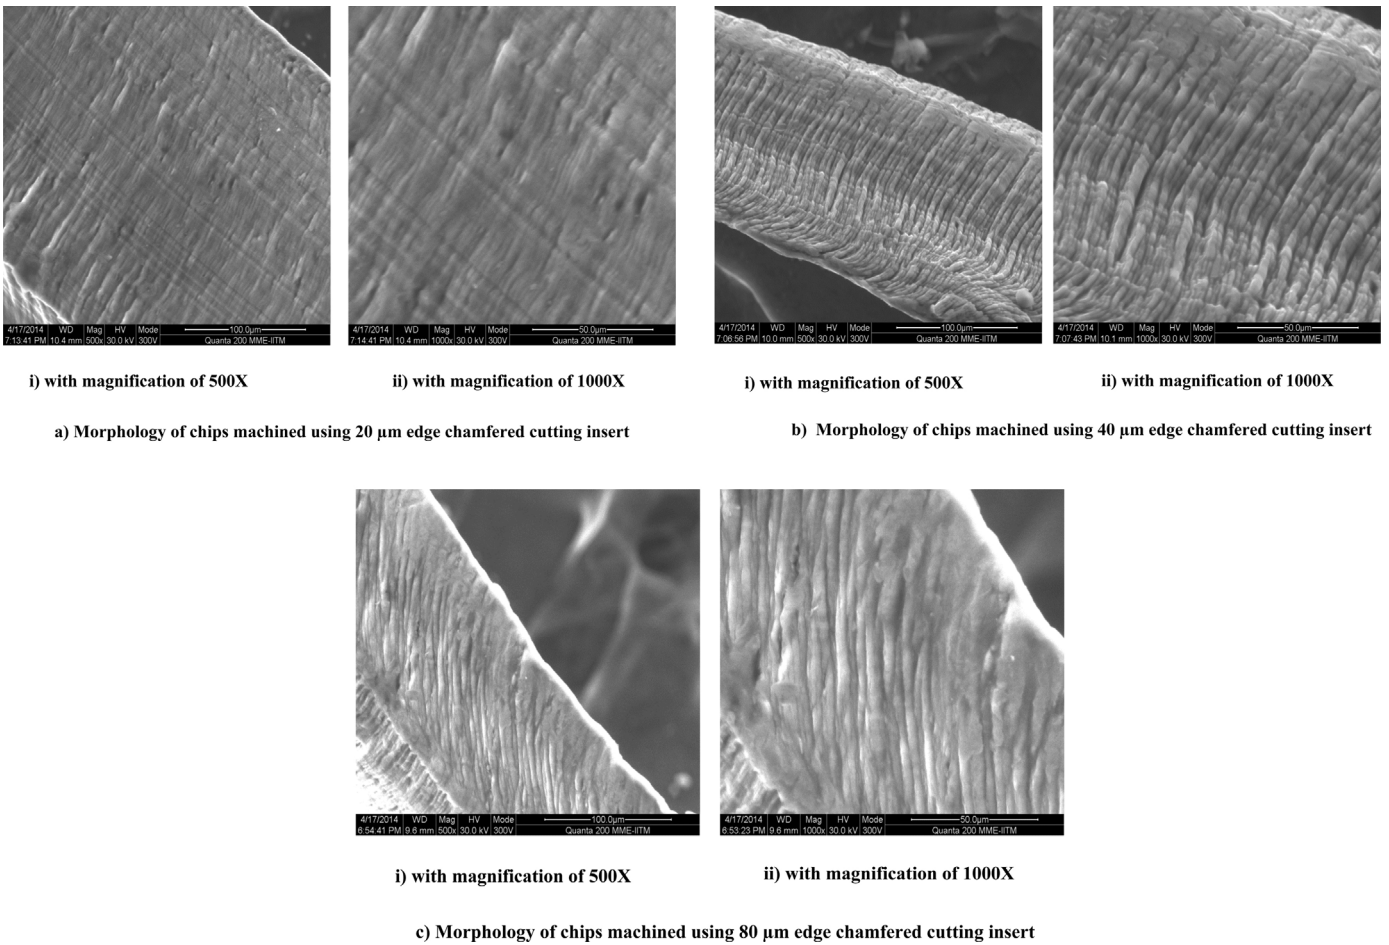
Chip morphology at 0.06 mm/rev feed rate, 1200 m/min cutting speed and 0.1 mm depth of cut using inserts with 20, 40 and 80 mm cutting edge chamfer: (a) morphology of chips machined using 20 mm edge chamfered cutting insert, (b) morphology of chips machined using 40 mm edge chamfered cutting insert and (c) morphology of chips machined using 80 mm edge chamfered cutting insert.
